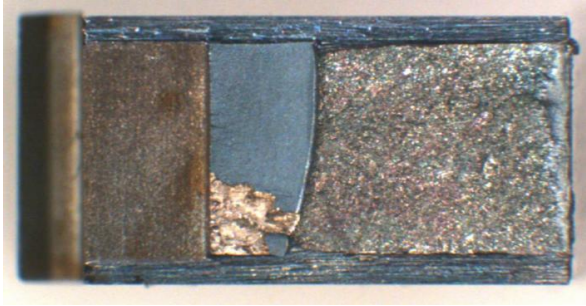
The growth of the fatigue pre-crack is suppressed by the weld metal, thus, the crack front can be skewed.
